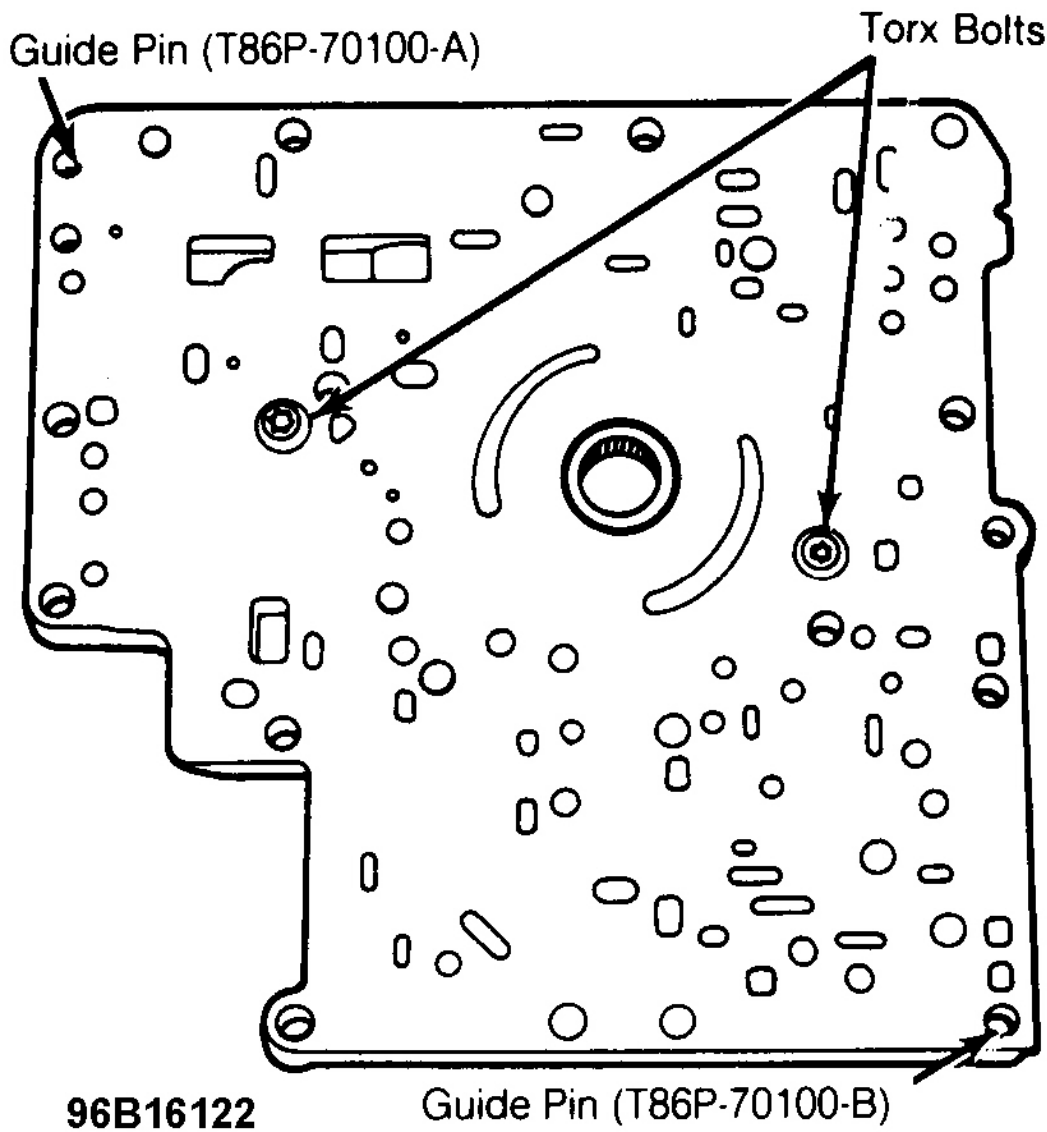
Oil Pump & Separator Plate Guide Pin Locations
